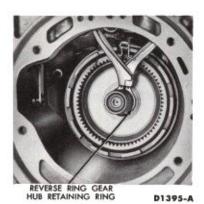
Reverse Ring Gear Hub Retaining Ring Removal or Installation
